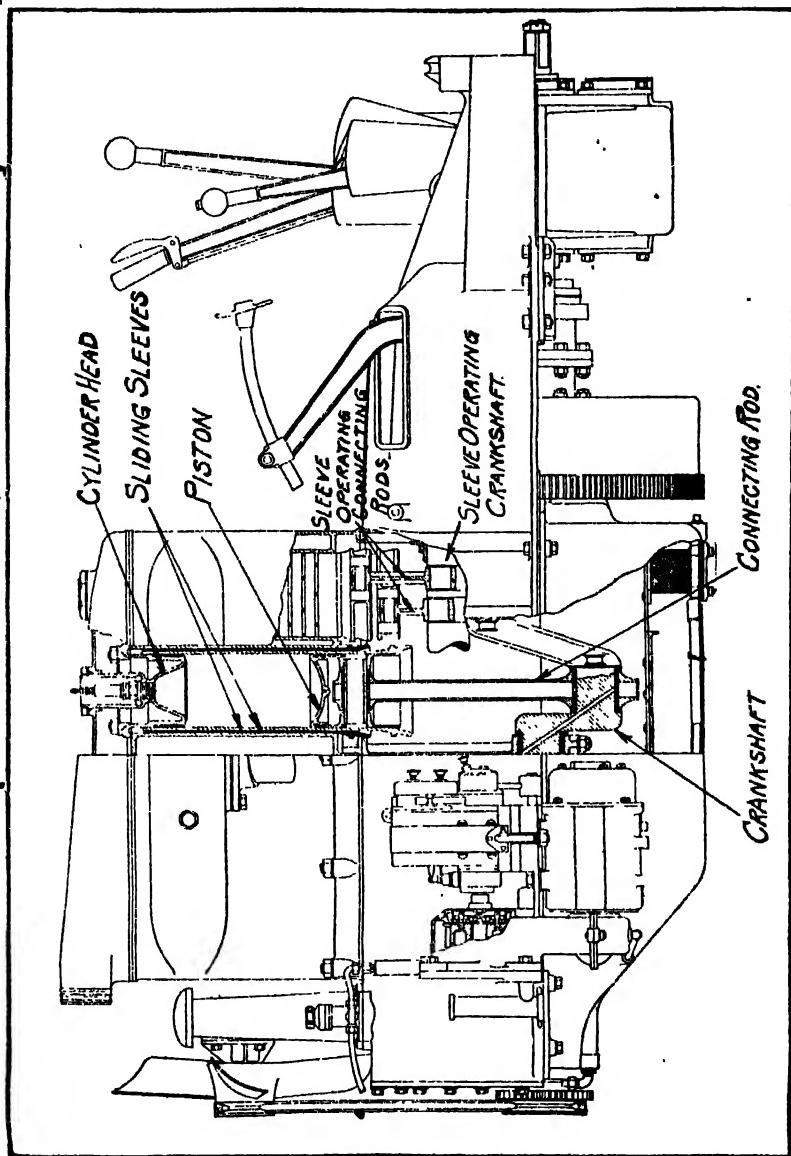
Sectional View of Knight System Sliding Sleeve Valve Motor
